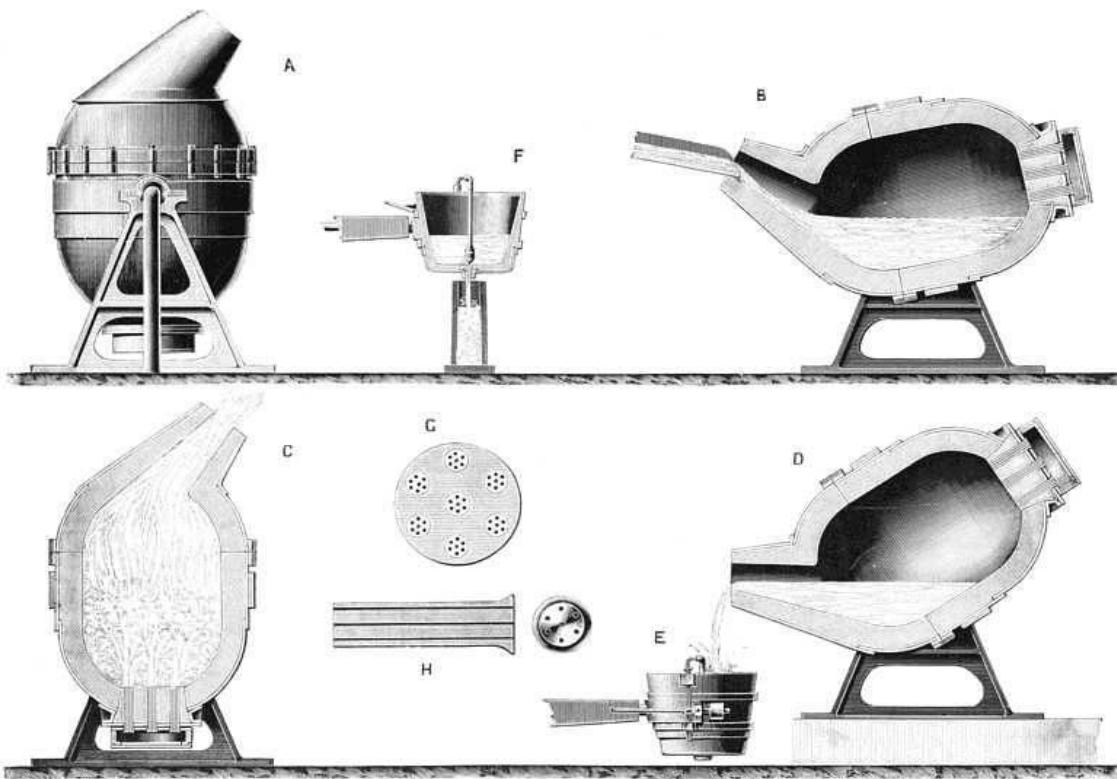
THE FIRST FORM OF BESSEMER MOVABLE CONVERTER AND LADLE
